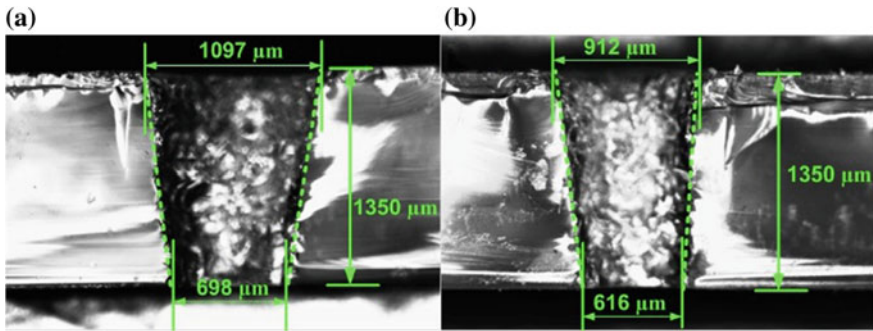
Cross-sectional view of through holes drilled using a solid and b hollow tool electrode
